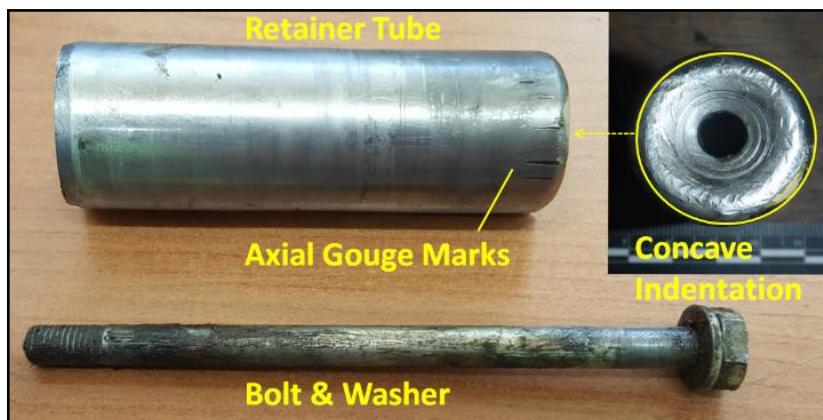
Retainer tube and attachment bolt & washer found in right-hand wing space
